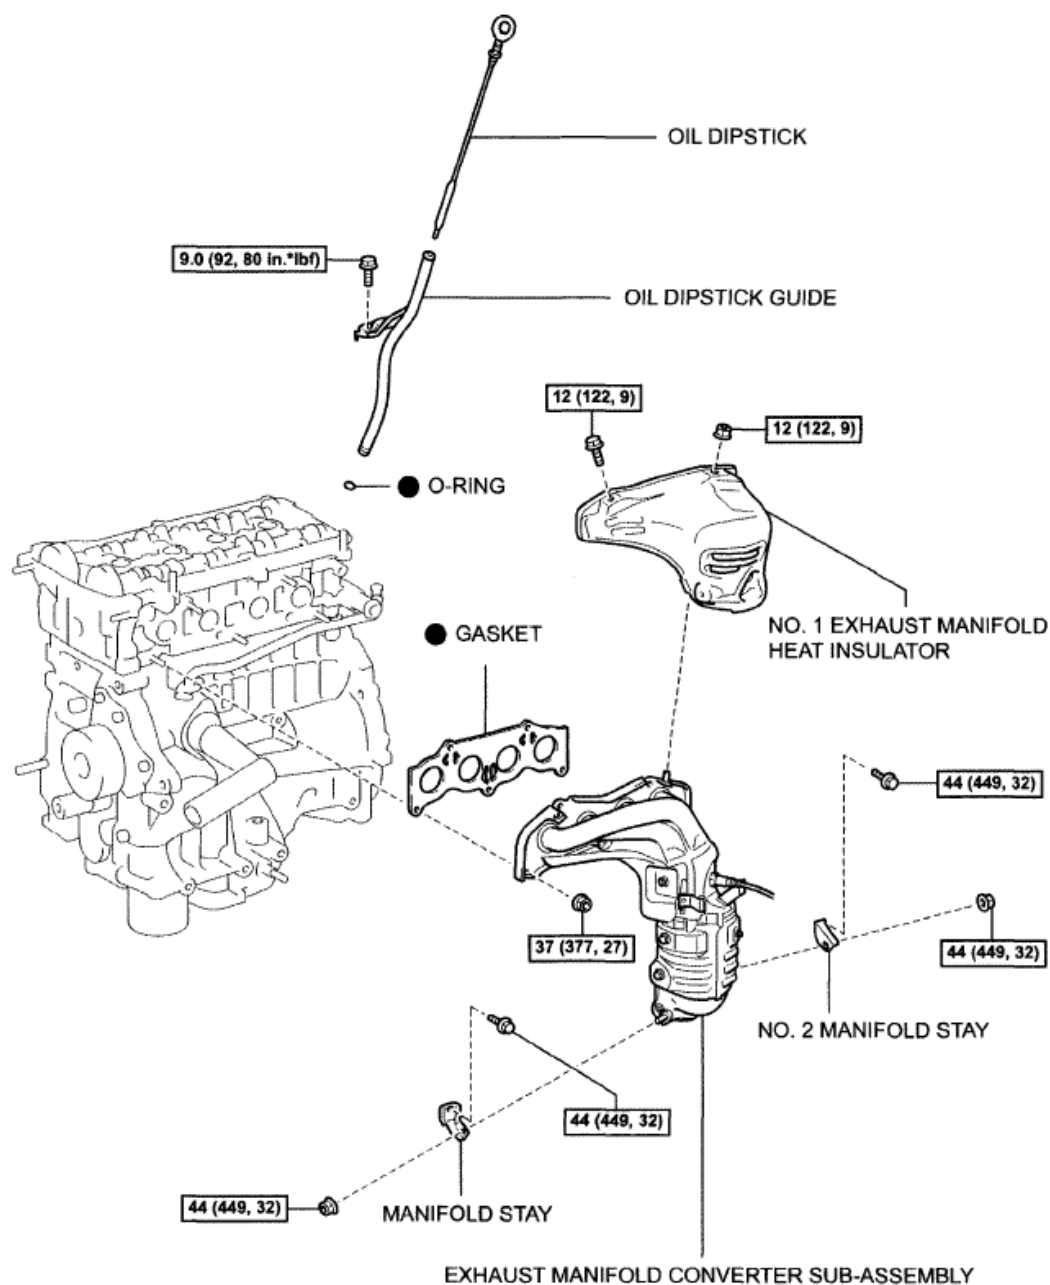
Identifying Cylinder Head Components With Specification (10 Of 13)
